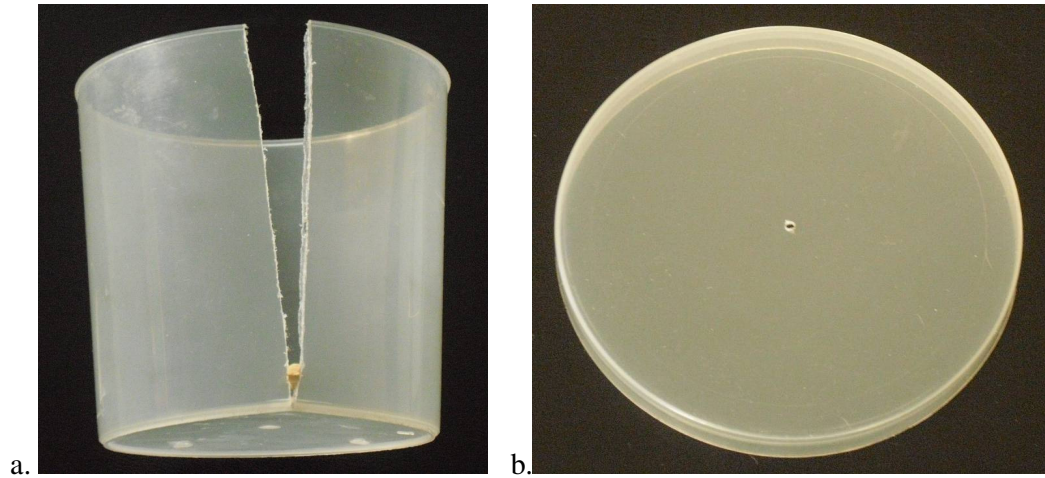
A photograph of the cut side of plastic pot used as a mould for the silicone elastomer test pieces (a) and the hole in the lid (b).
